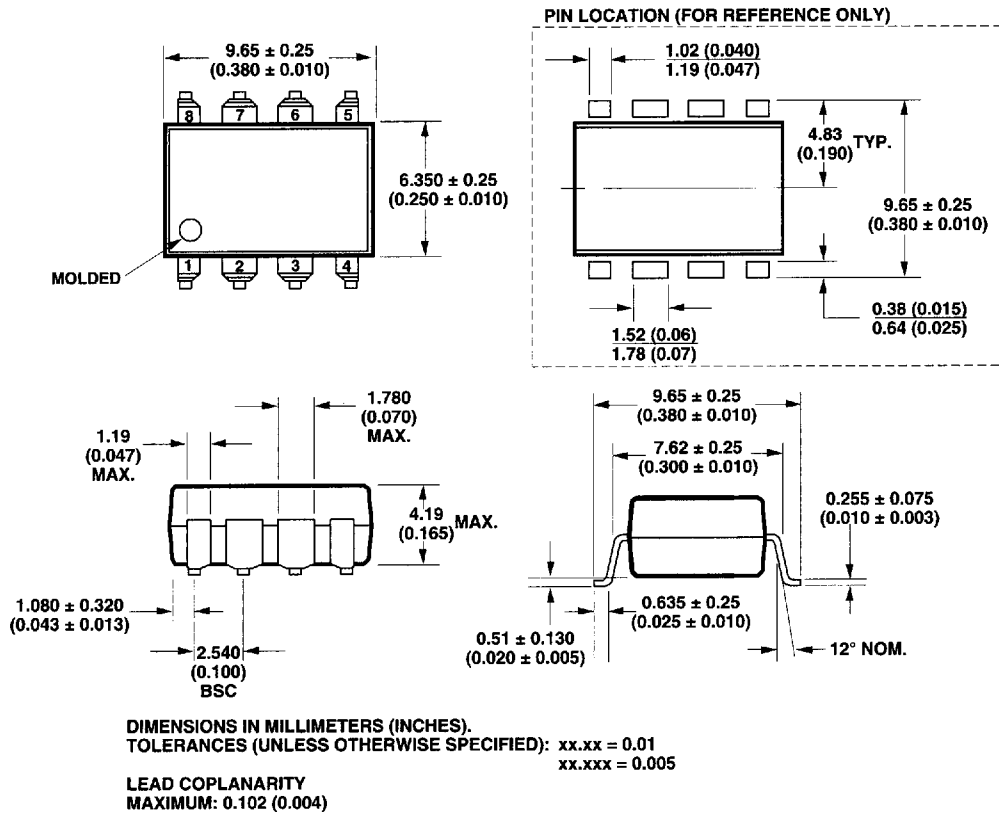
HCPL-4506 Gull Wing Surface Mount Option #300 Outline Drawing.
